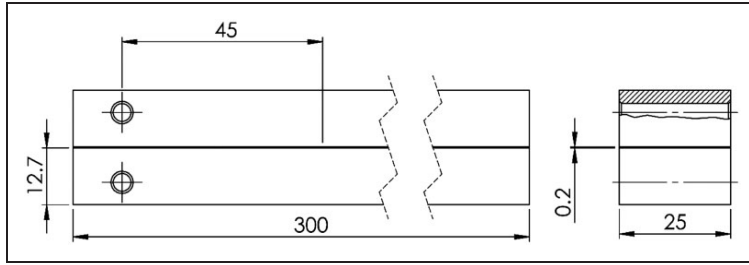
DCB specimen used, with dimensions in mm, based on ASTM 3433.
